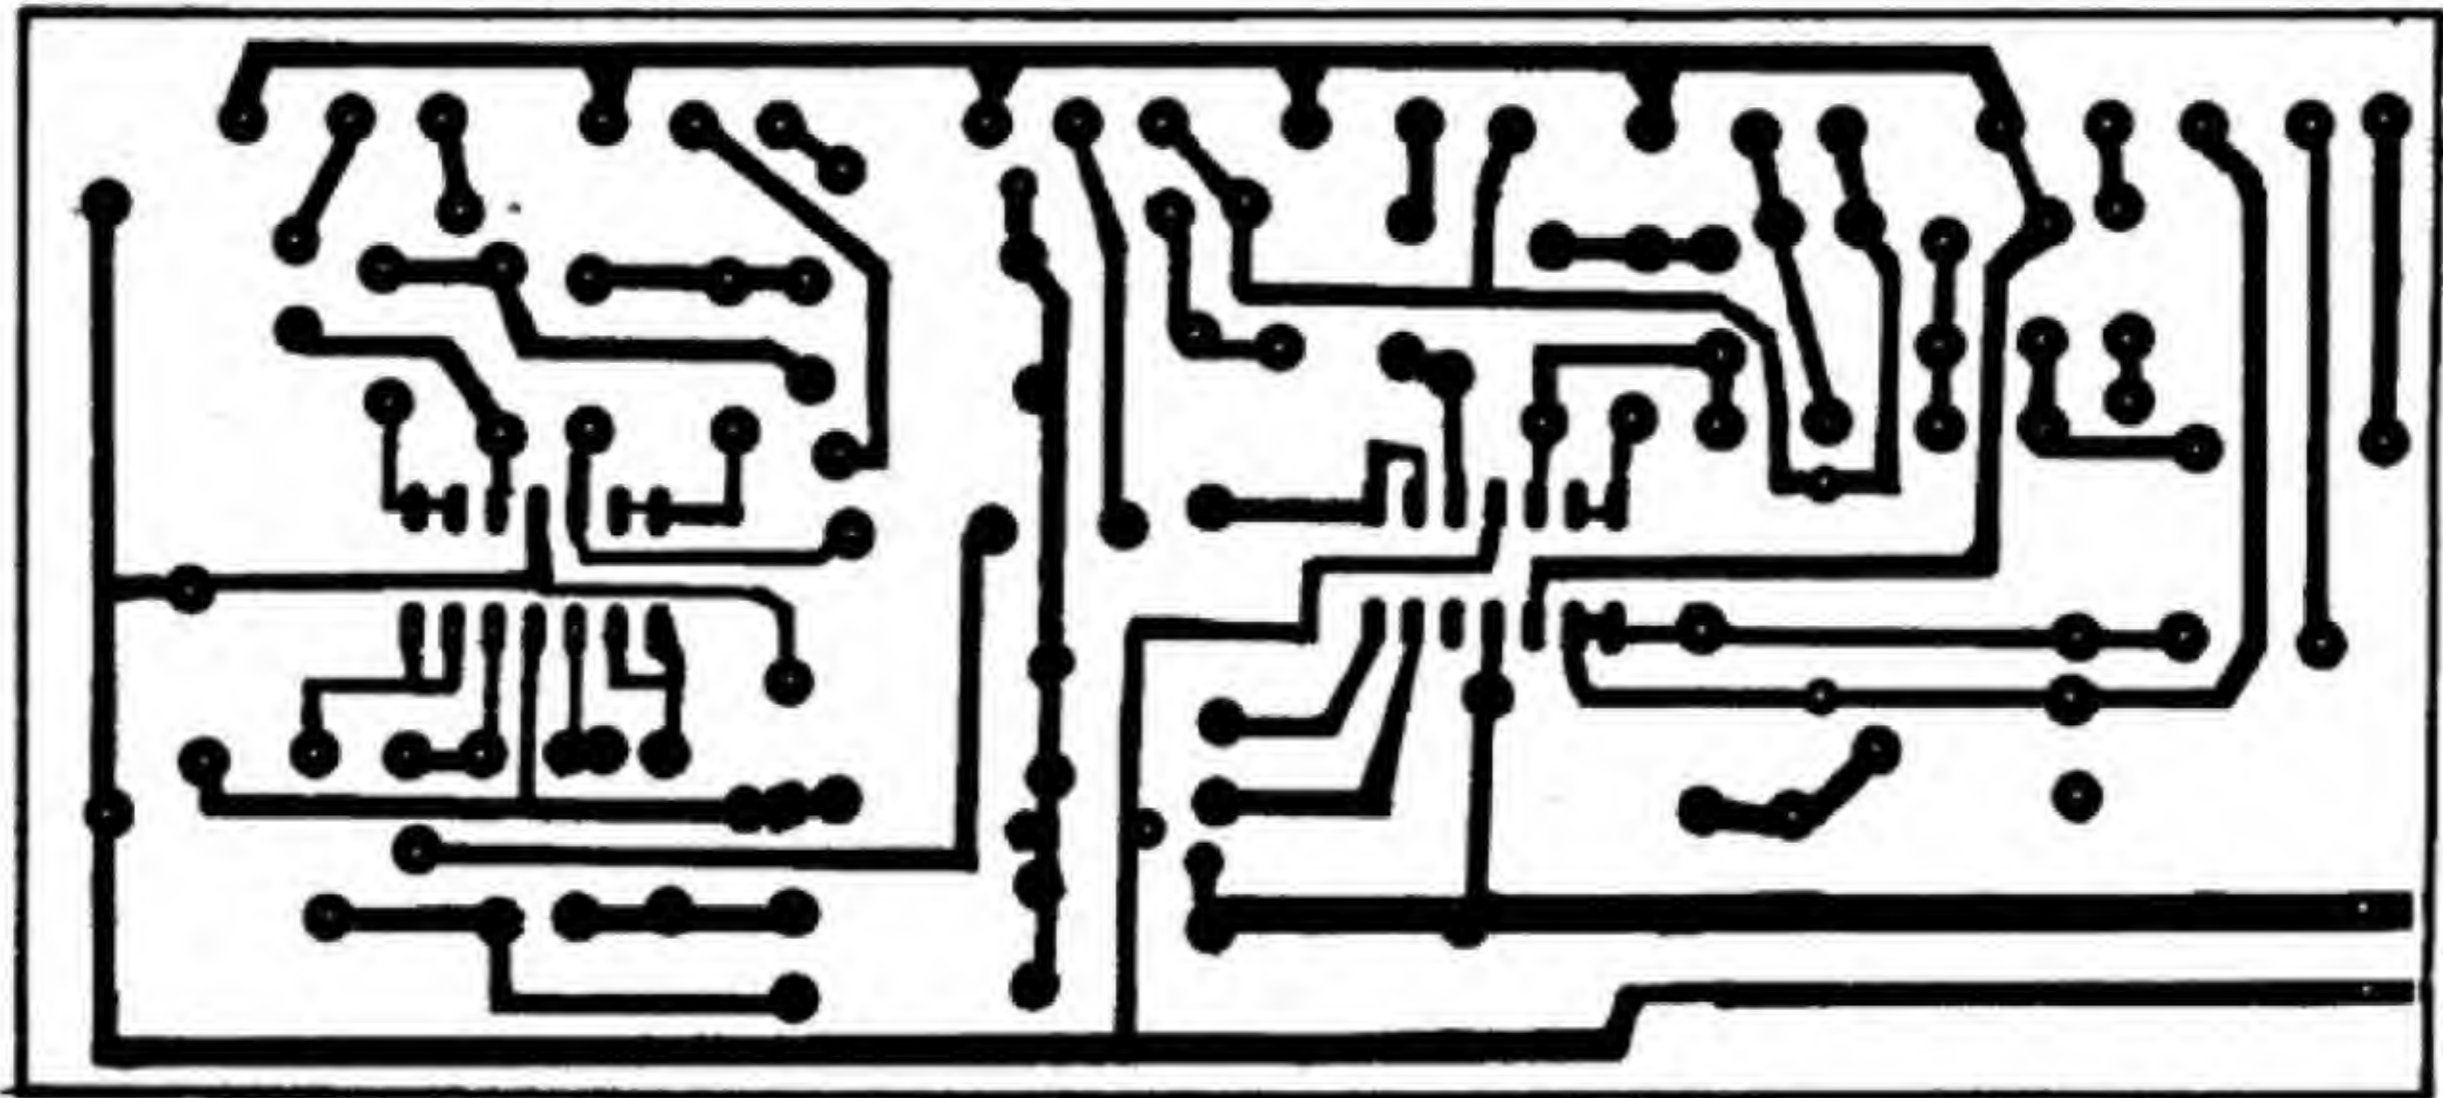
PCB layout for the 6-band low-cost graphic equaliser.
